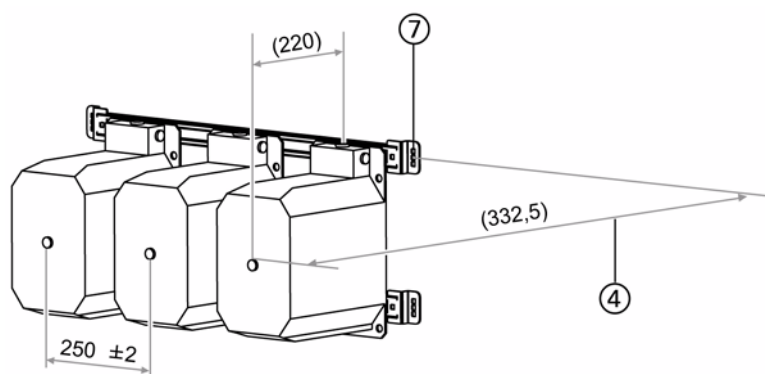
Dimensions and mounting positions of transformers in an air-insulated metering panel type busbar-busbar (dimensions in mm) for 12 kV
